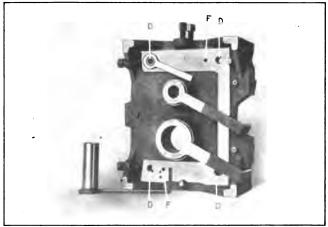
Rear View of Drill Jig shown in Fig. 73
